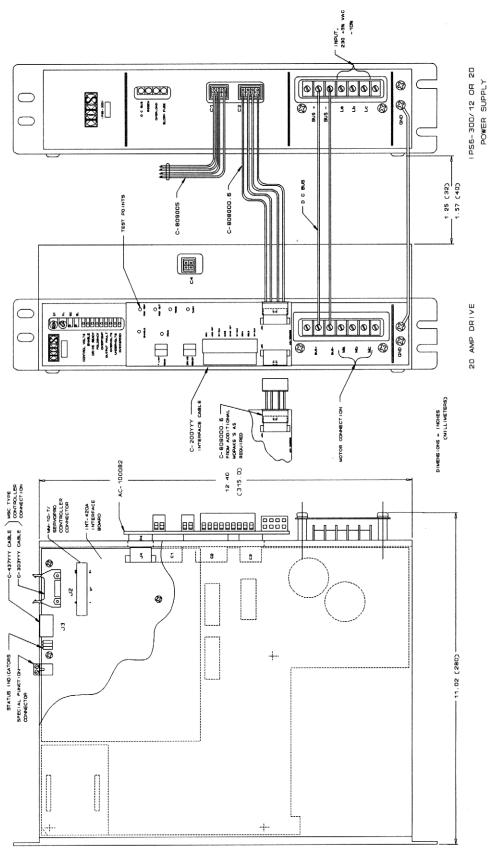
Typical Installation Drawing for 20 Amp BSD6 Drive
